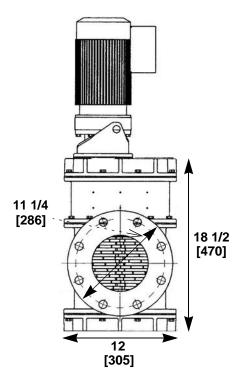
MUFFIN MONSTER 10000 4" SIDE DIMENSIONS - C
